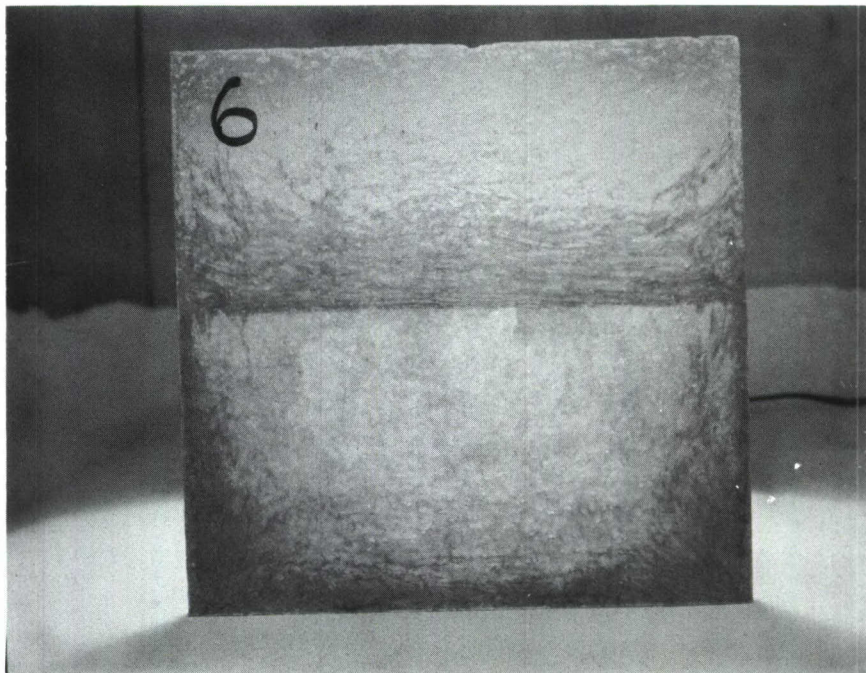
A Tapered Plate Molded From A 6" x 12" Preformed Biscuit Placed In The Thinner End Of The Mold Cavity
